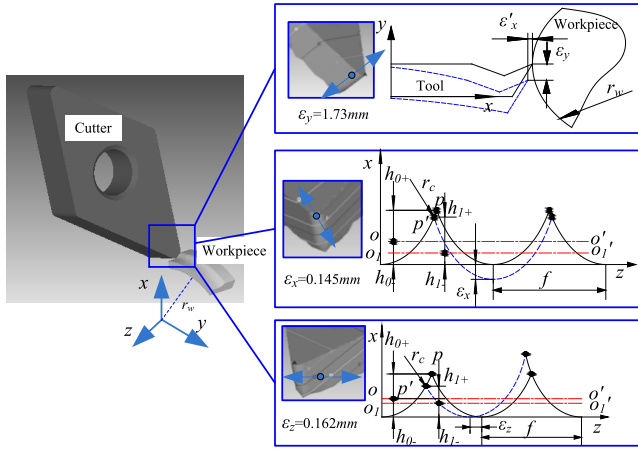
Effect of tool-tip vibration on the workpiece surface topography.
